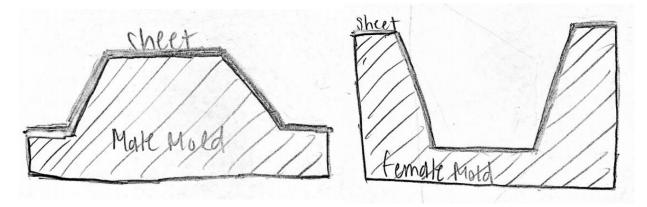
Male mold (left) vs. female mold (right) used in vacuum thermoforming.
